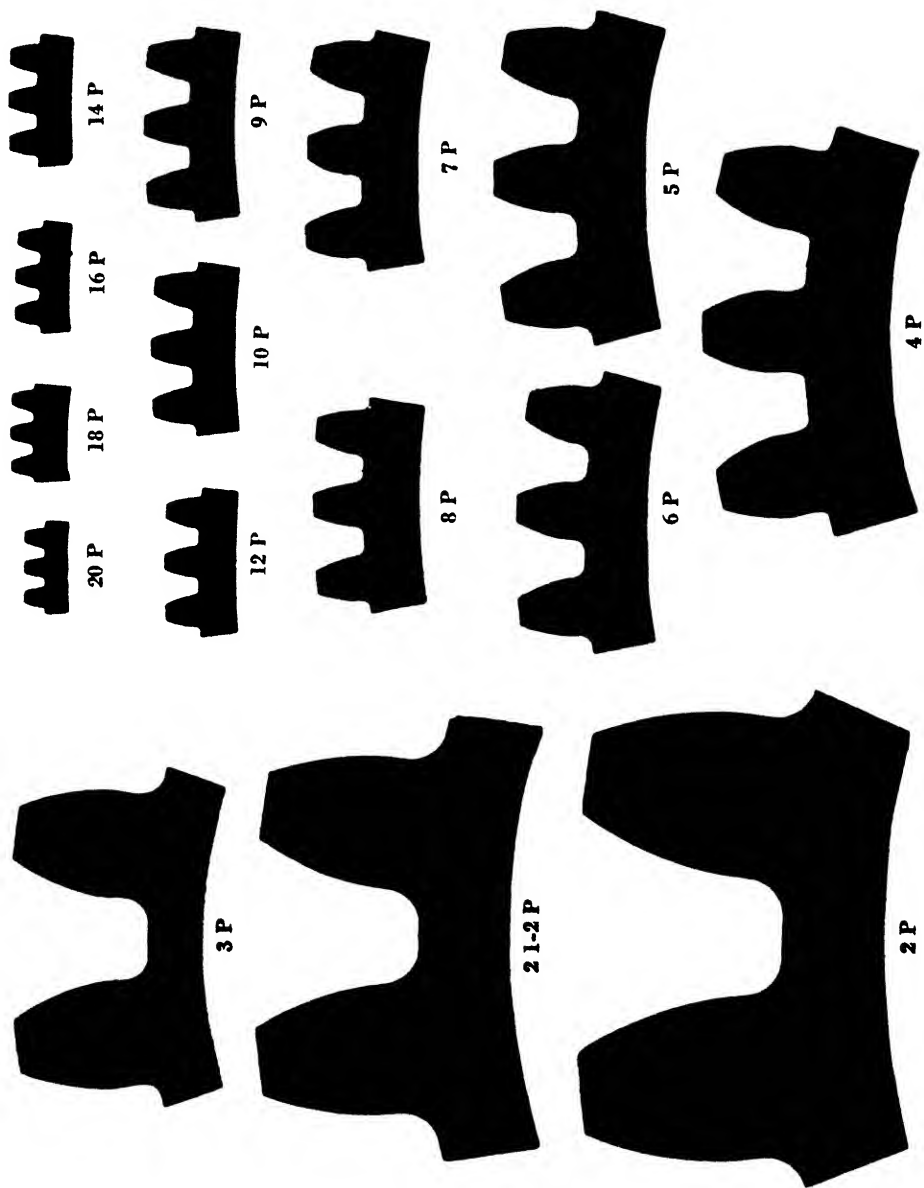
COMPARATIVE SIZES OF INVOLUTE GEAR TEETH.
